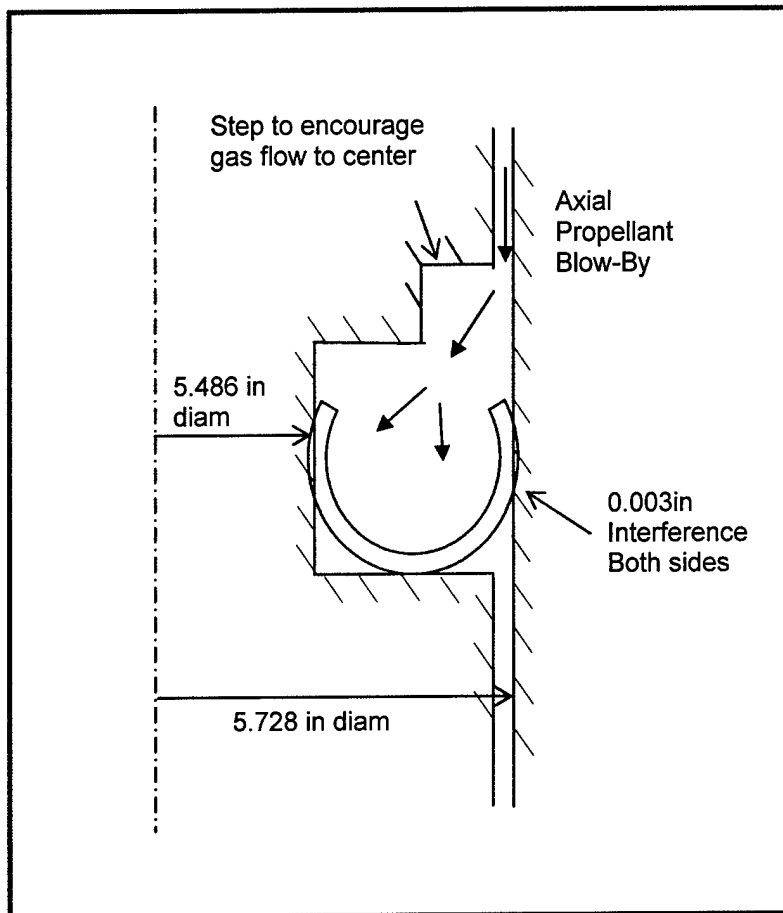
Nitinol C-Ring Cross-Sectional Dimensions
